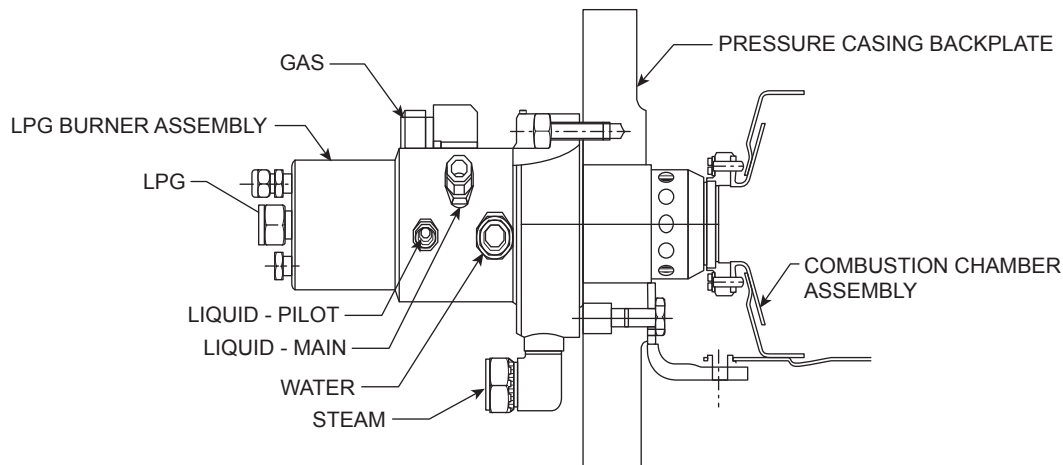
Typical combustion assembly. (Source: Alstom Power.)
